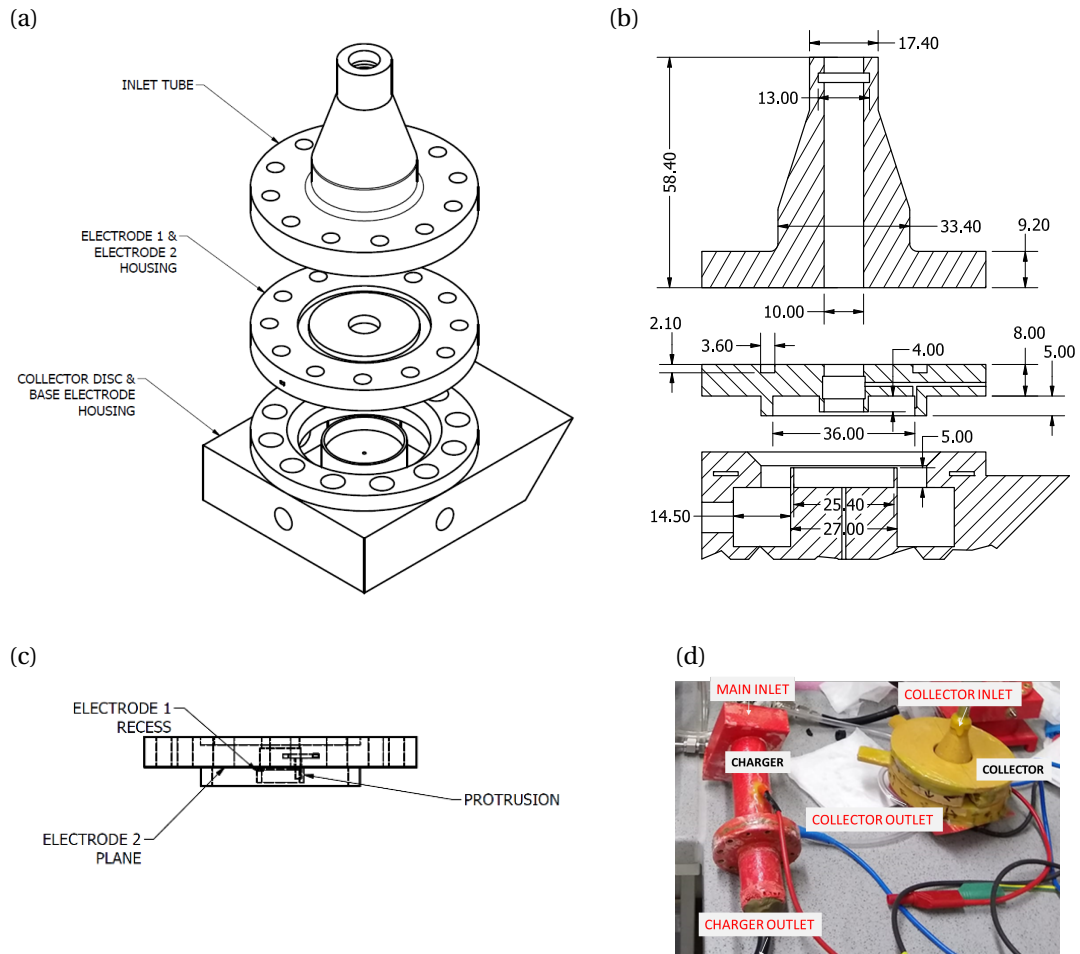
(a) Engineering drawing of the device assembly, cross-section view with dimensions (in mm), (c) side view of the electrode housing part with the protrusion visible, and (d) fabricated and assembled device with the different parts labelled.
